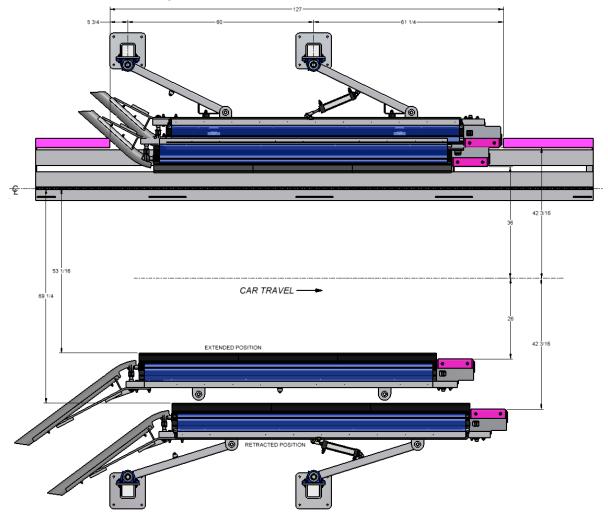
Mounted Tire Glaze With Extend and Retract Dimensions
